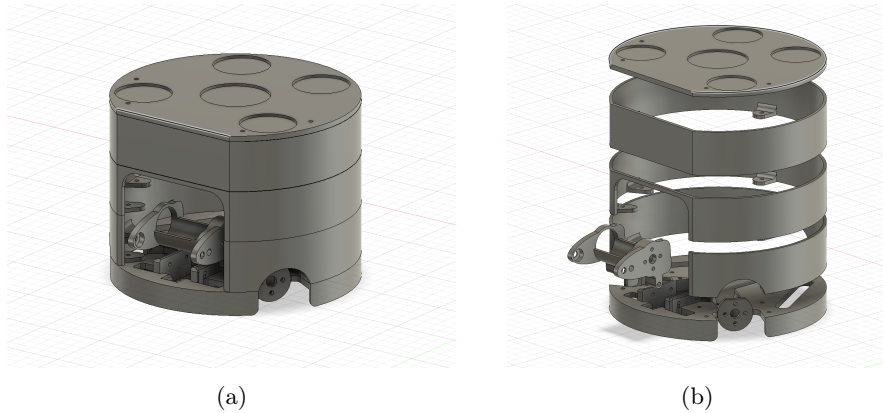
Overview of the 3D designed robot: (a) assembled view, (b) exploded view
